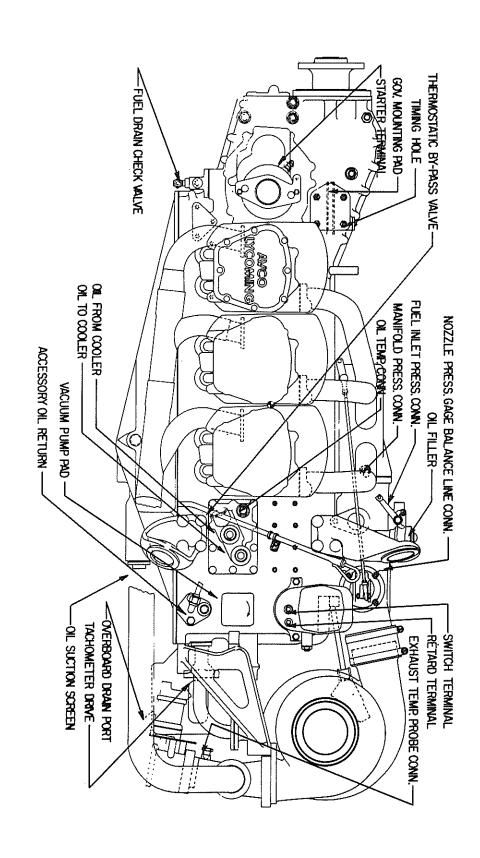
Installation Drawing - Right Side View - Typical TIGO-541 Series
